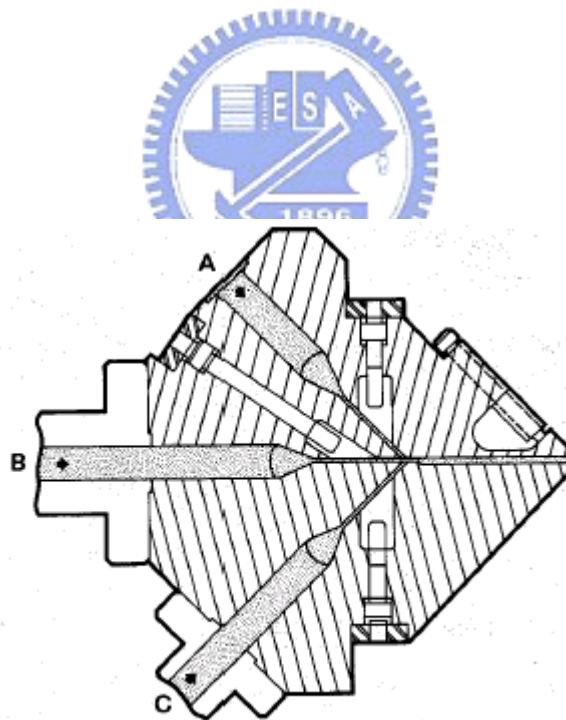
Cross-sectional view of three-layer multimanifold flat film die.
